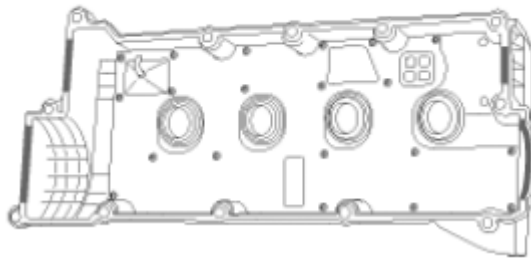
Identifying Liquid Gasket Applying Area On Head Cover Gasket
